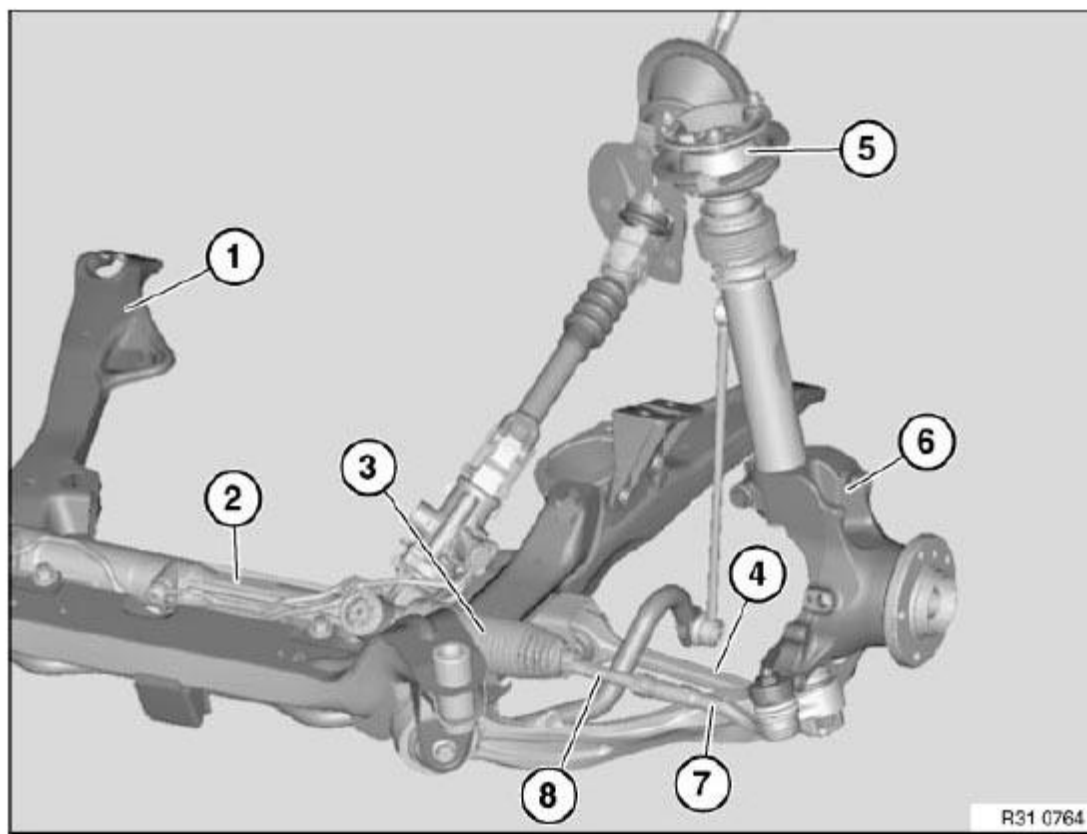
Identifying Front Axle + Steering (AWD) Components
